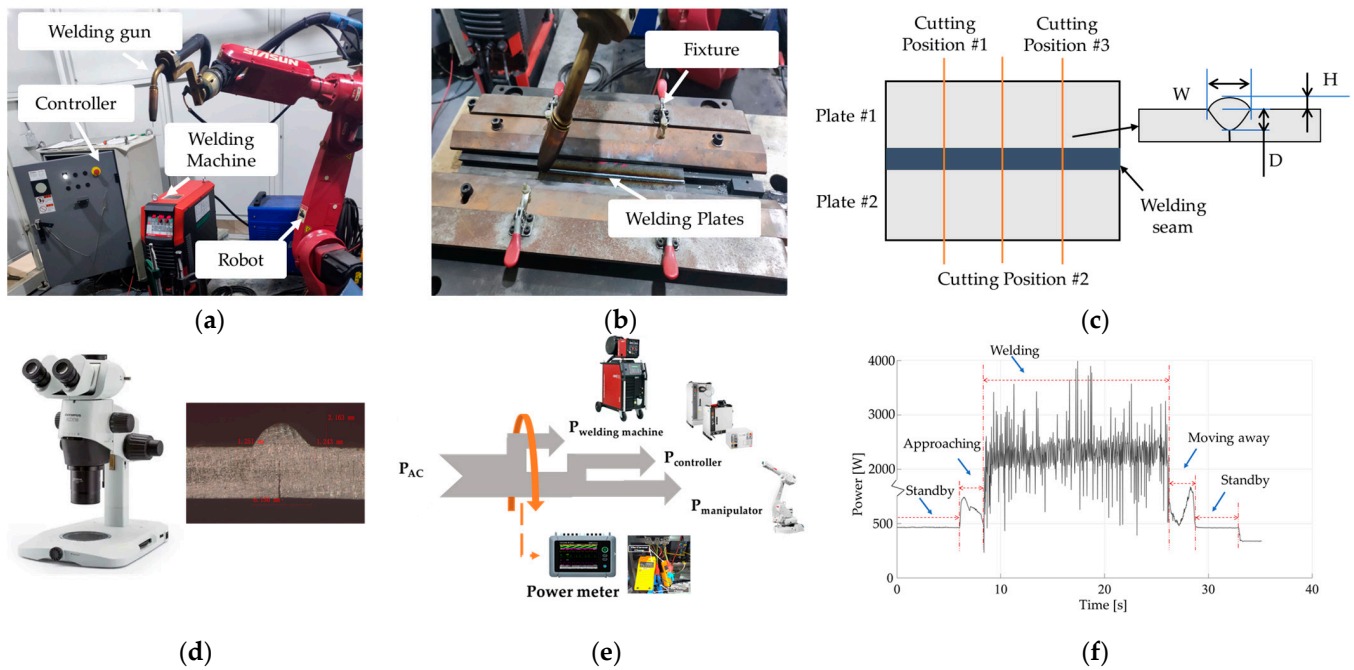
(a) Welding robot system of experiment platform; (b) fixture for welding plates in the platform; (c) schematic diagrams of cutting positions for welding plates and measurement of welding seams; (d) the microscope, OLYMPUS SXZ12, for measurement of welding seams; (e) the oscillograph recorder, YOKOGAWA DL350, and the power flow measurement scheme; and (f) power flow of the WR system for welding process.
